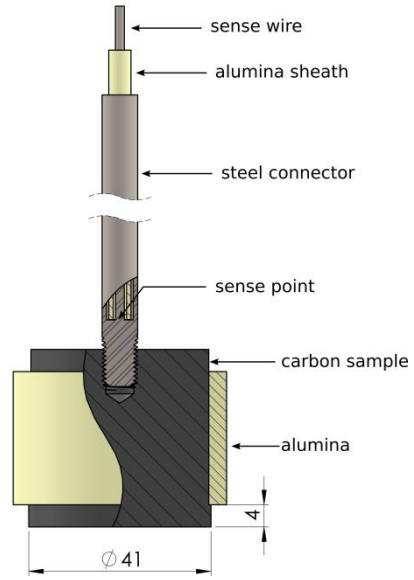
Electrode assembly used for bubbles oscillations measurements.
